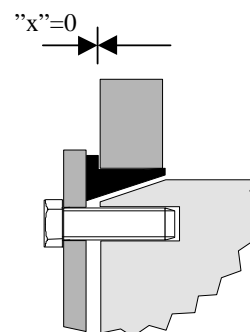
Too much play results in no "wedging force". Switch to over-sized taper. "X" is measured between the taper flange and support.
